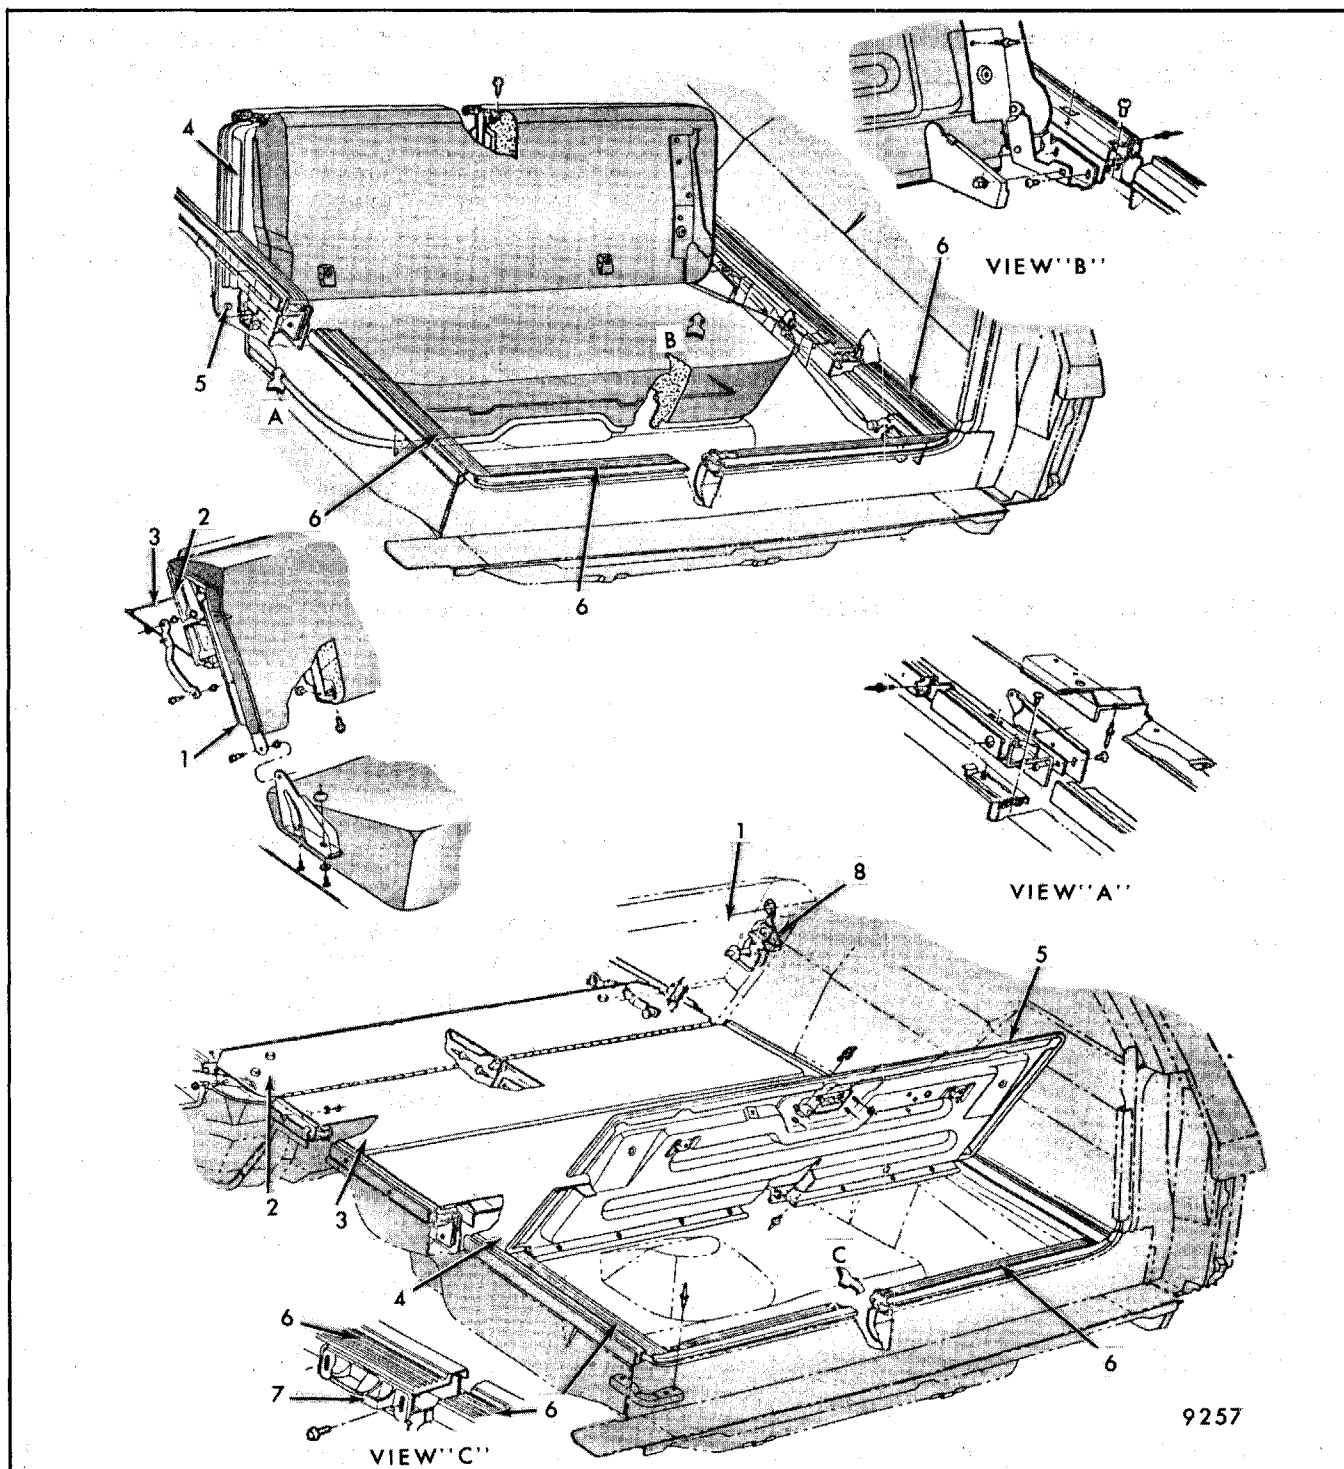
Folding Seats and Load Floor Panels - "B" Body Styles
